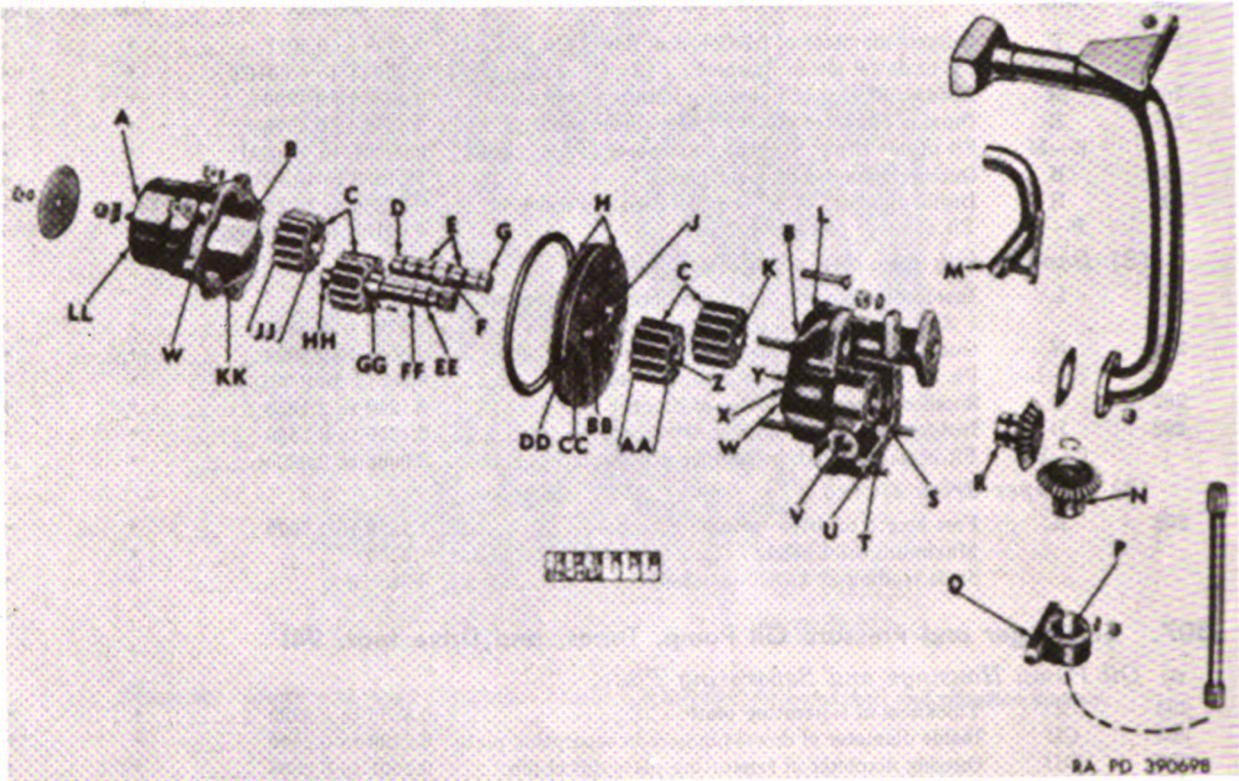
Repair and rebuild standard points of measurement for scavenger and pressure oil pump, tubes, and drive.
